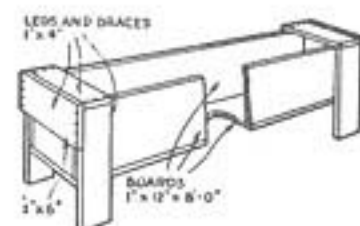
Be sure that the edges of the boat tank boards are heavily coated with white lead before being nailed together. This will be of help in making the joints water-tight.
